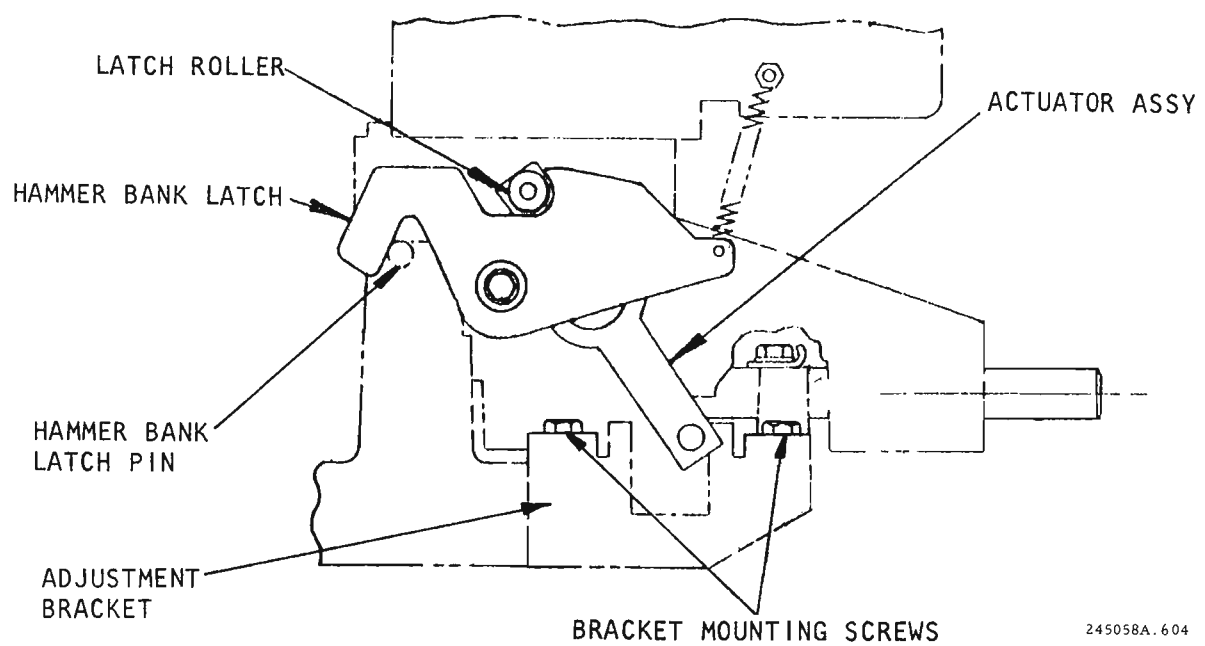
Hammer Bank Latch Assembly (Right Side)
